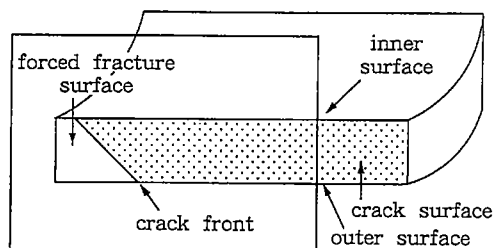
Crack surface of rodlet cladding tube (segment B)
